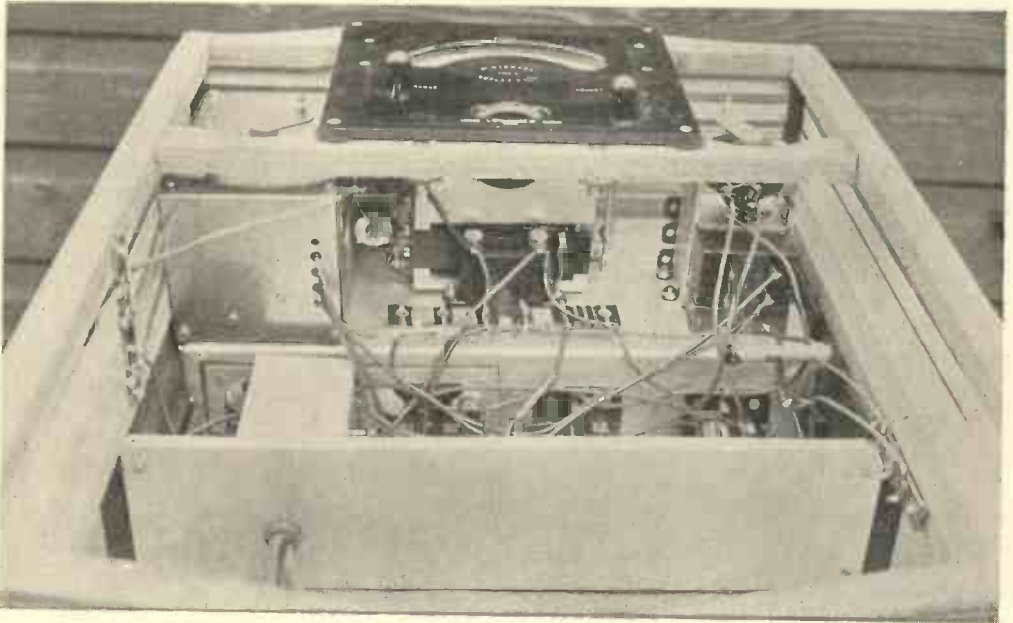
THE CHASSIS READY FOR TESTING COMPONENTS.
